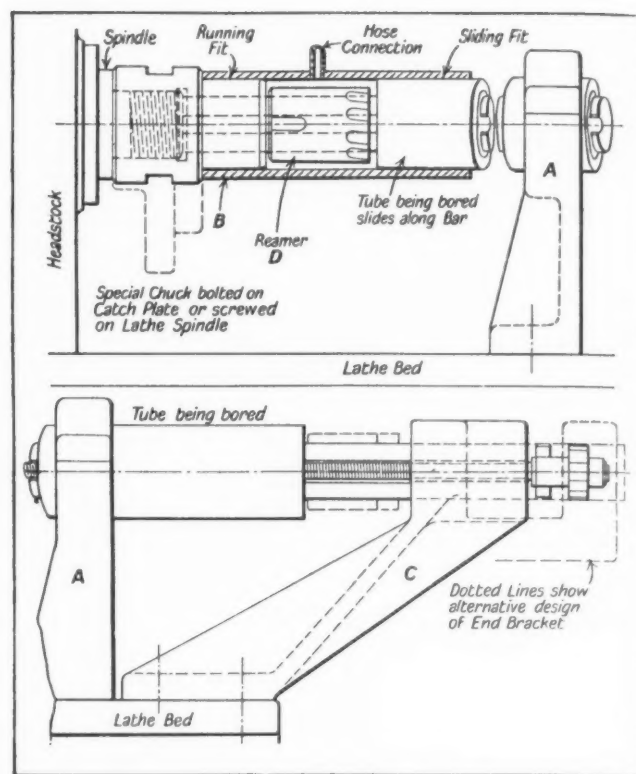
General Arrangement of Tube Boring and Reaming Equipment
